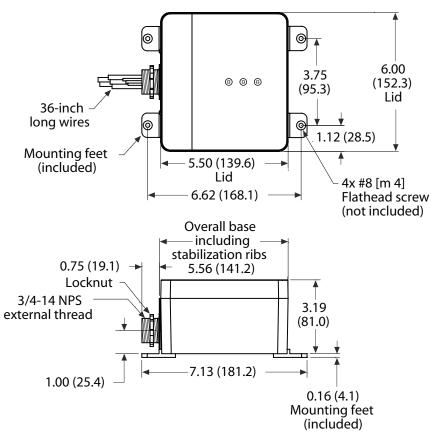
P1 enclosure, NEMA 4X with mounting feet dimensions, weight = 2.5 lb
